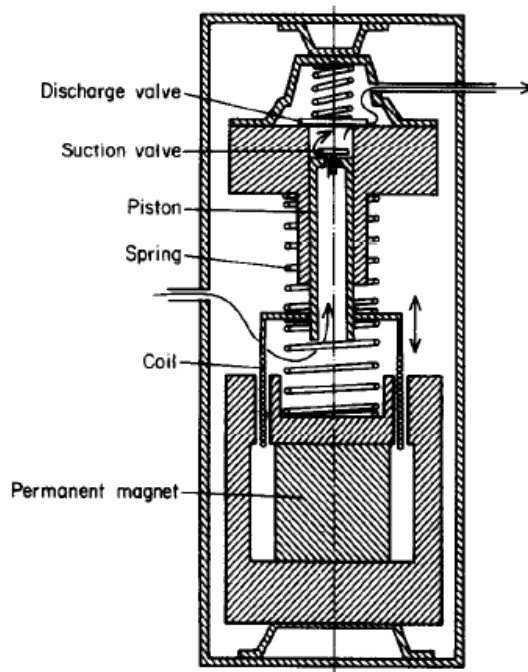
Schematic drawing of oscillating electrodynamic compressor [4].
